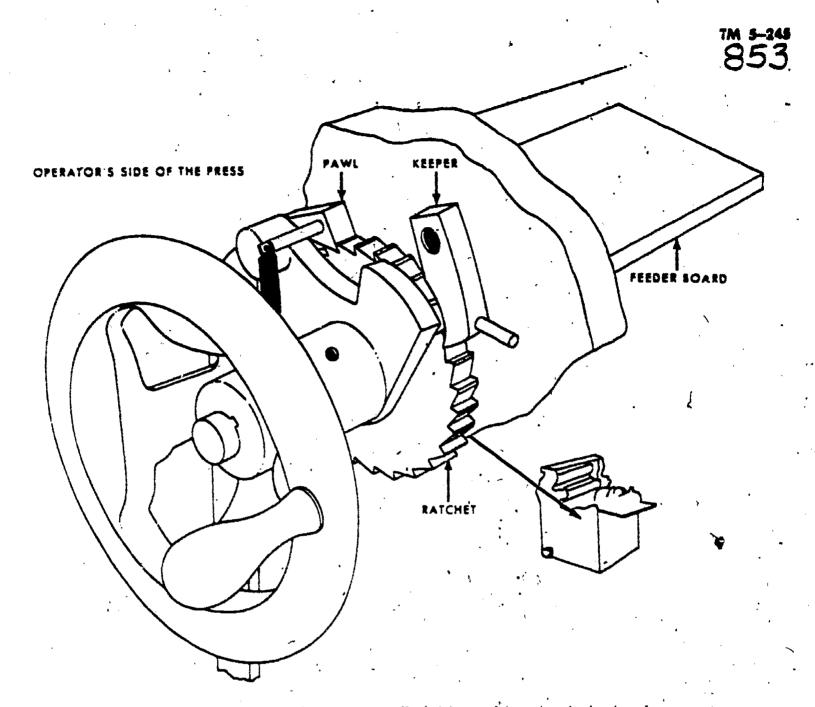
Handwheel for manually faising and lowering feeder board.
